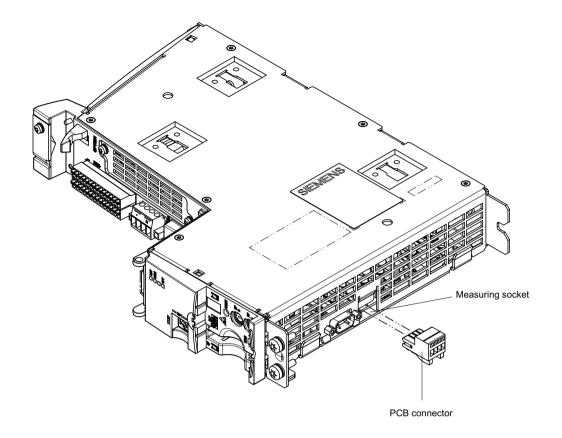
Mounting a PC board connector (Phoenix Contact) in the measuring socket
